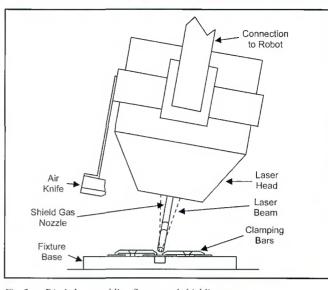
Diode laser welding fixture and shielding gas setup.
